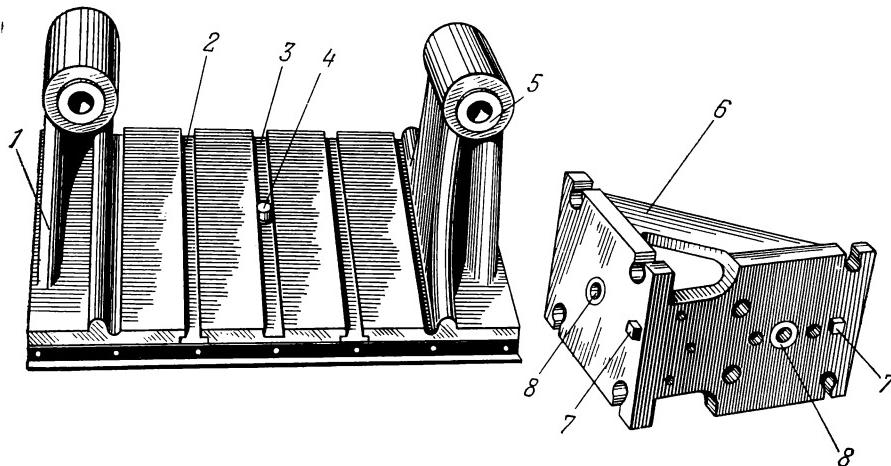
Pallet (fixture) with an interchangeable holder for one of a group of different workpieces
